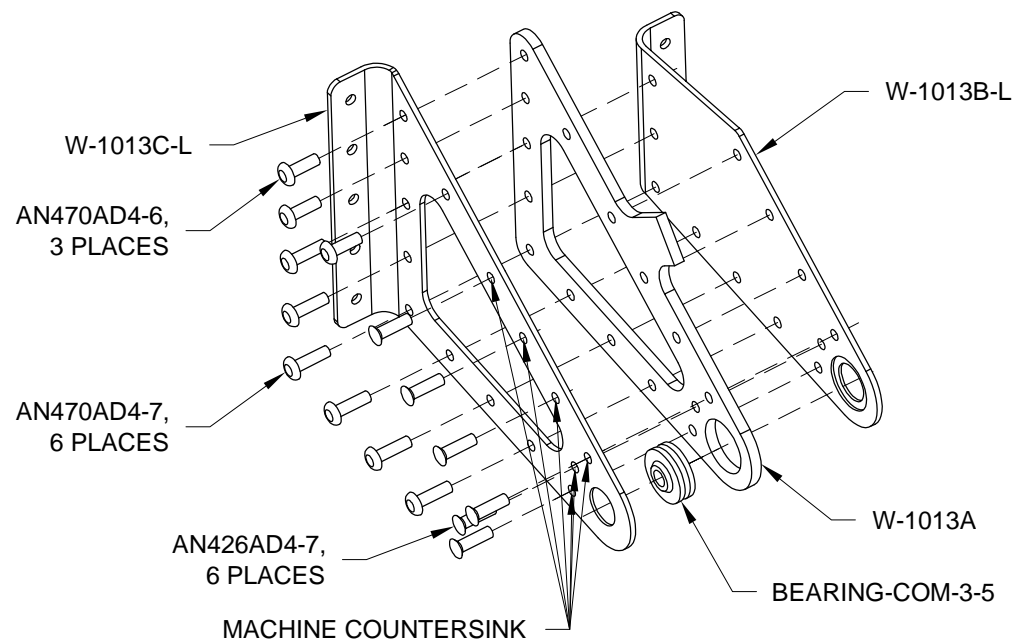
HINGE BRACKET SPACER TRIM FOR OUTBOARD AILERON HINGE BRACKET ASSEMBLIES
